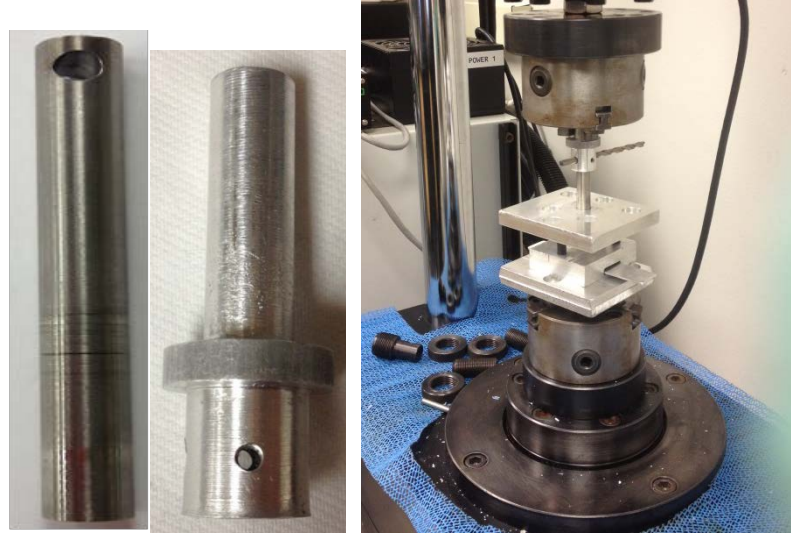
(a) Titanium rod sample with a drill hole; (b) fabricated top specimen holder for fatigue test; (c) fatigue test setup of Concept IV
